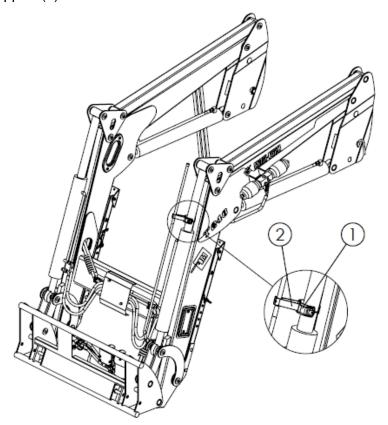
Indicator adjustment 1 - lock catch 2 - support
